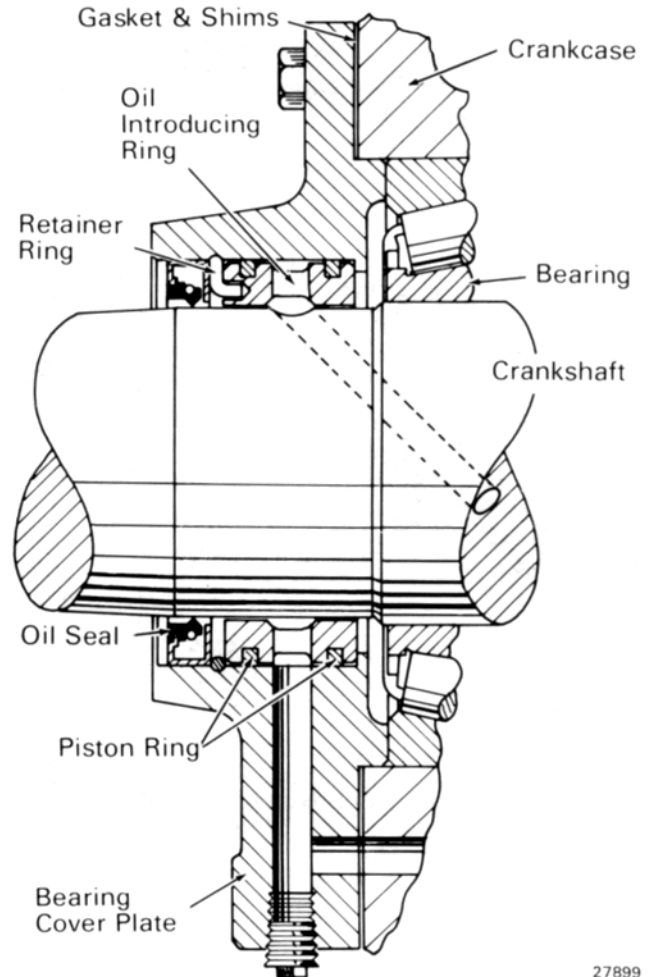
Gear-Pump Compressor-Exhauster Oil Introducing Assembly
